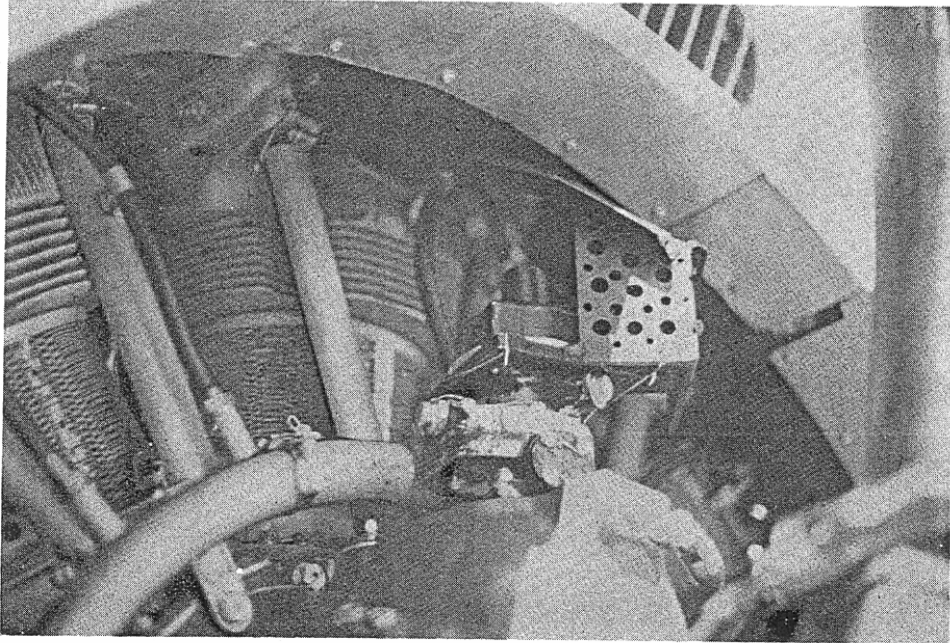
Armor plating on T-28 engine. Note armored ignition harness, push rod housings and propeller governor.
